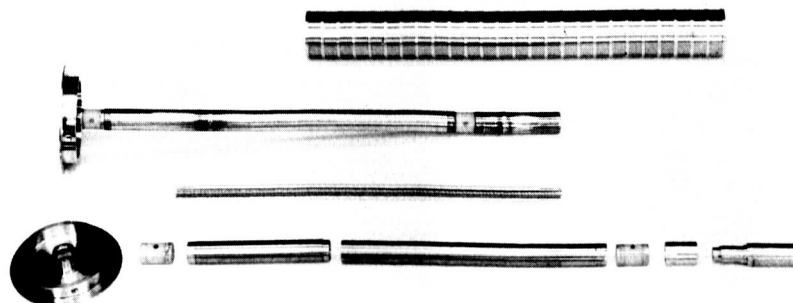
Syncom Traveling-Wave Tube Helix Assembly
